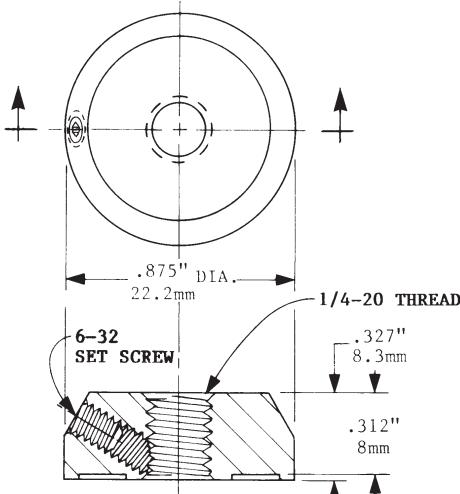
MUSHROOM RECEIVER DIMENSIONS
